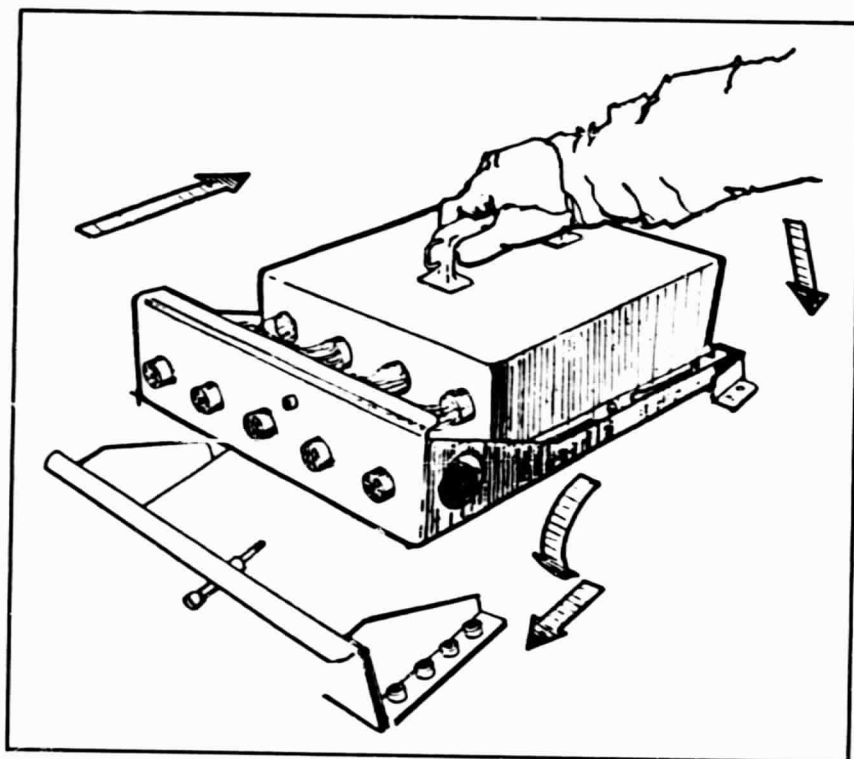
ORU Mounting Technique Utilizing Alignment Guides and Rack/Panel Design
